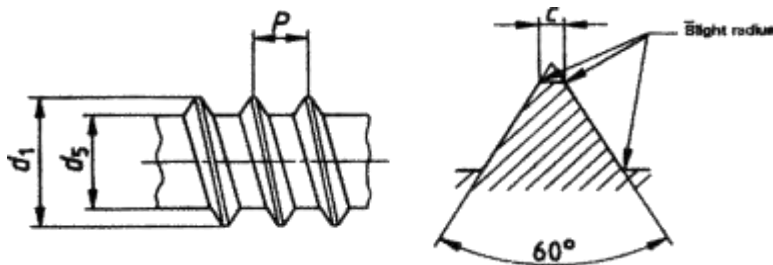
Schematic diagram of HC screw thread dimension (Table 3)
